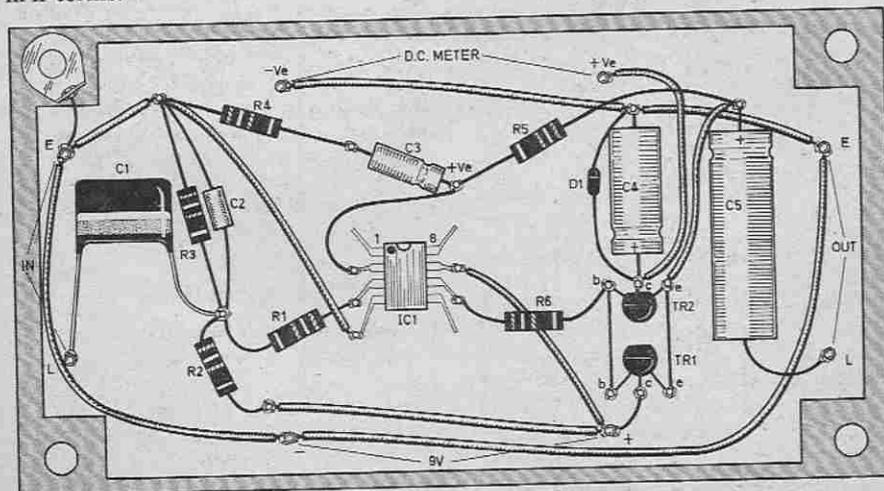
Plywood circuit board glued to Formica front panel. All components and wiring soldered to miniature household pins.
